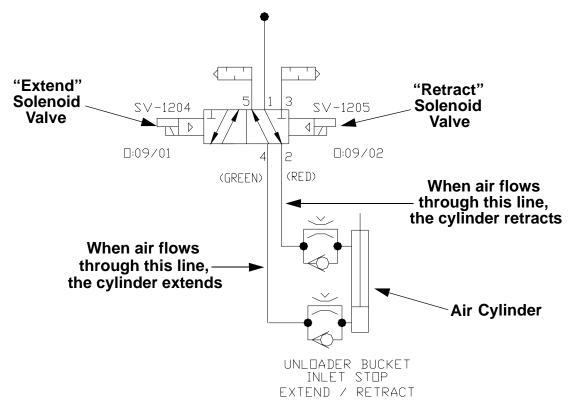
Double Solenoid Valve on Pneumatic Drawing
